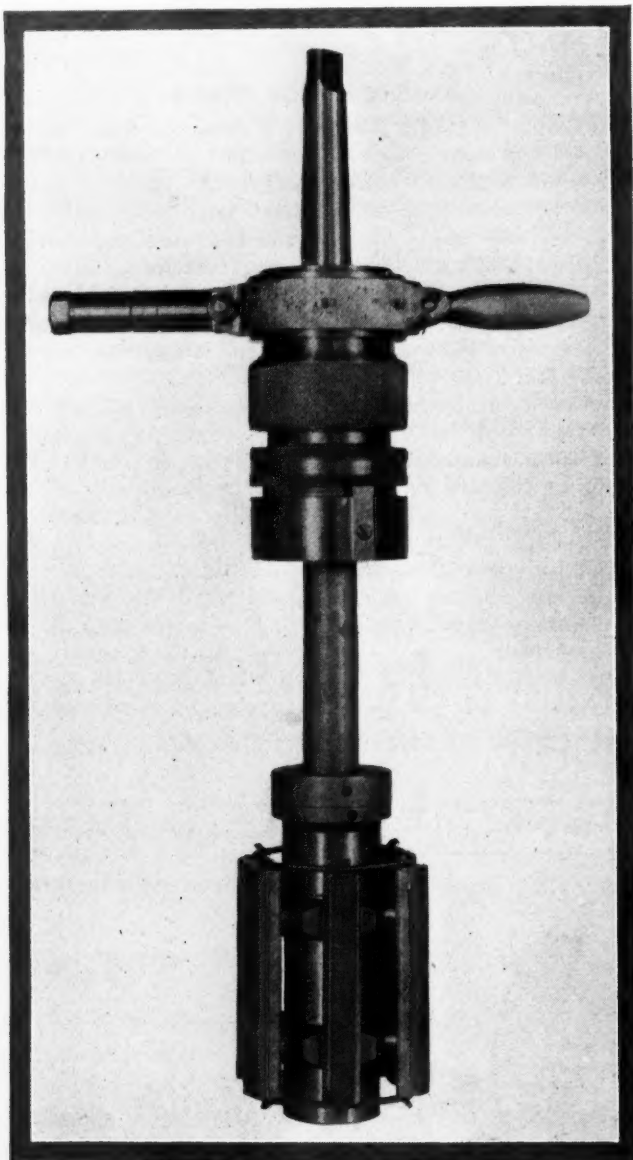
Hutto grinder and friction type driving head. A floating bar enclosing a square adjusting shaft joins the two
